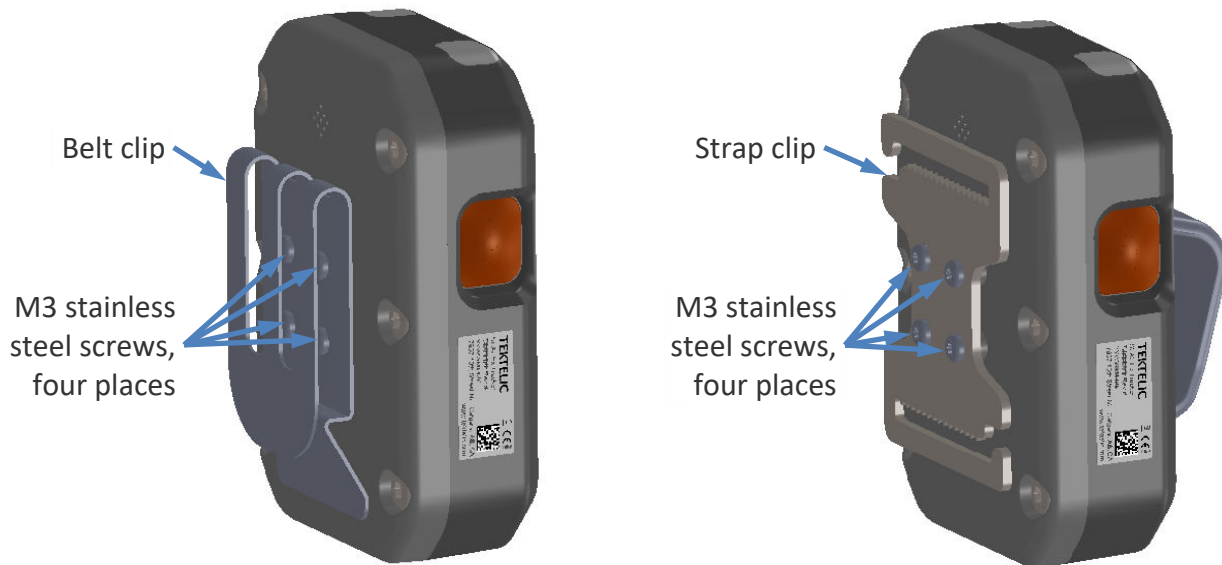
SEAL Ex Wearable GPS Tracker Showing Optional Mounting Clips
